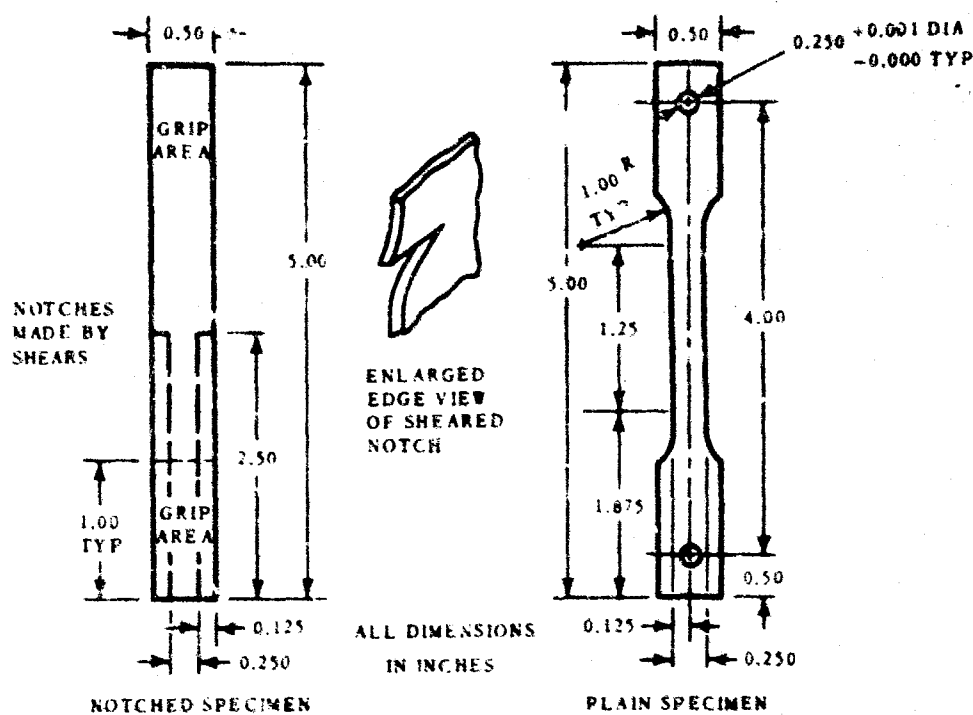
FOIL TENSILE TEST SPECIMENS
